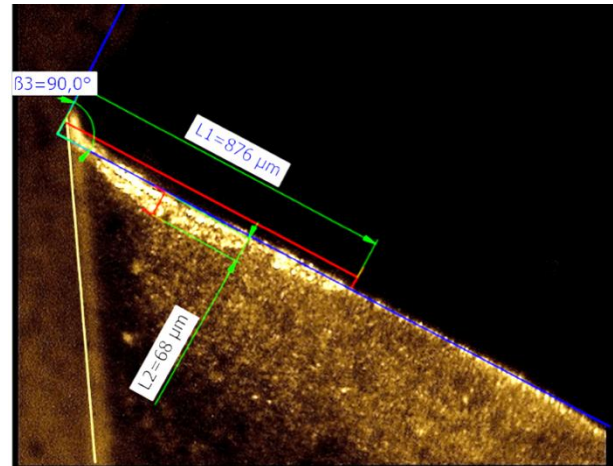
Measurement result of tool wear width (V_B) and wear length on one of the inserts cutting tools.
